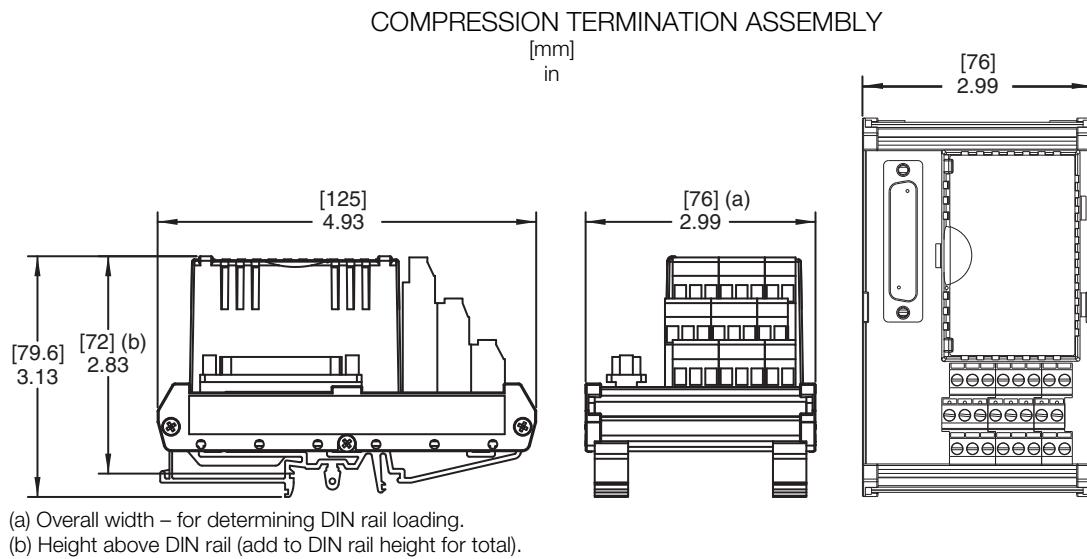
Passive Termination Assembly (P0922VC) Dimensions (Nominal)
